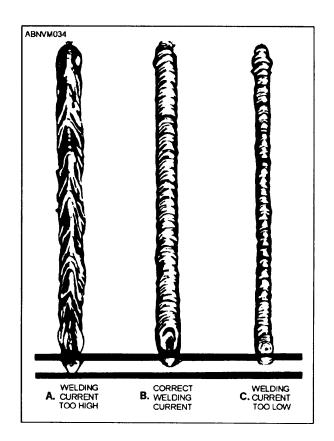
Comparative GTA weld beads as determined by electrical current.
